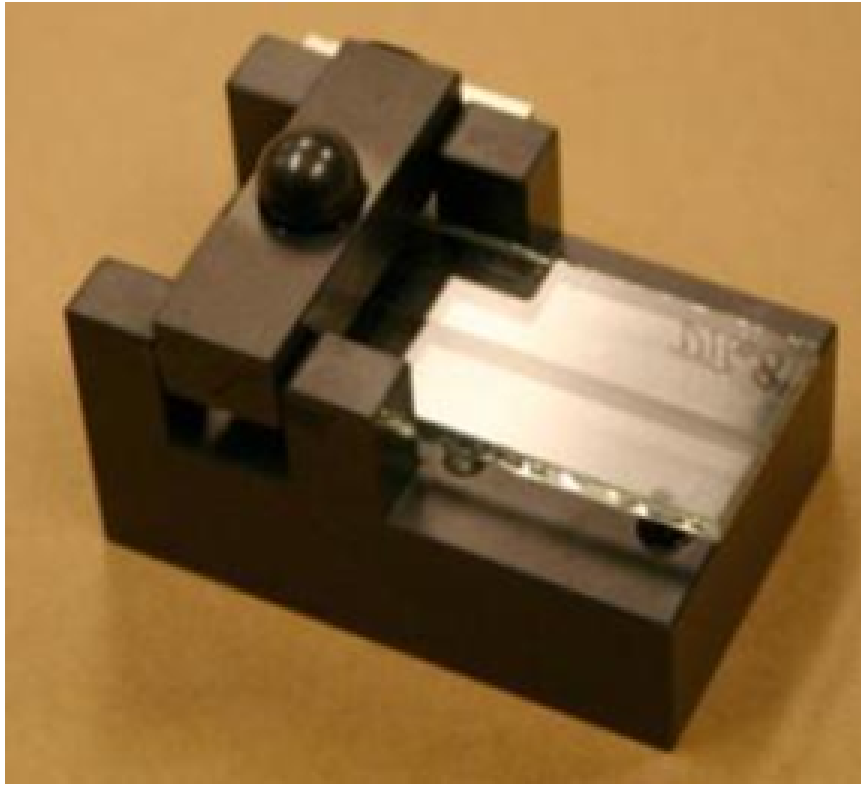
DT fixture with a simple layout with load actuator applying load to the specimen. The load actuator is guided by the base to ensure alignment (by Salem [34]).
